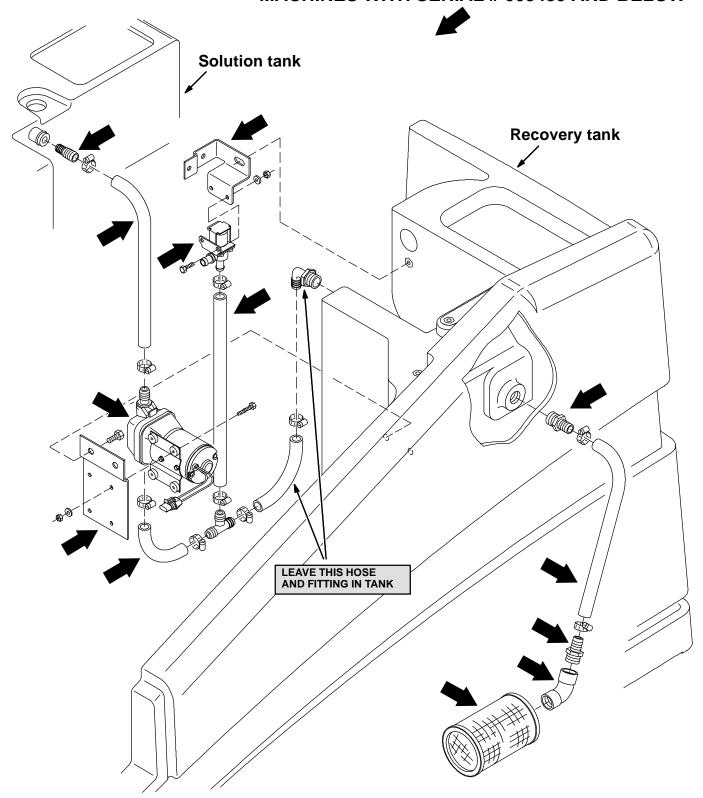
ES™ Parts To Remove And Discard (machine serial # 005439 and below)
